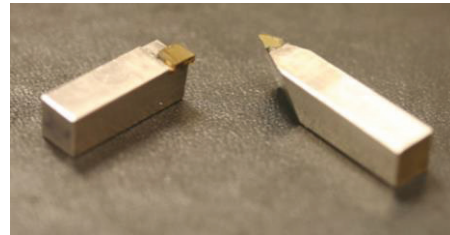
Two types of diamond tools were used during this research: a wide straight edge diamond tool (left) and a 0.5mm radius diamond tool (right).
